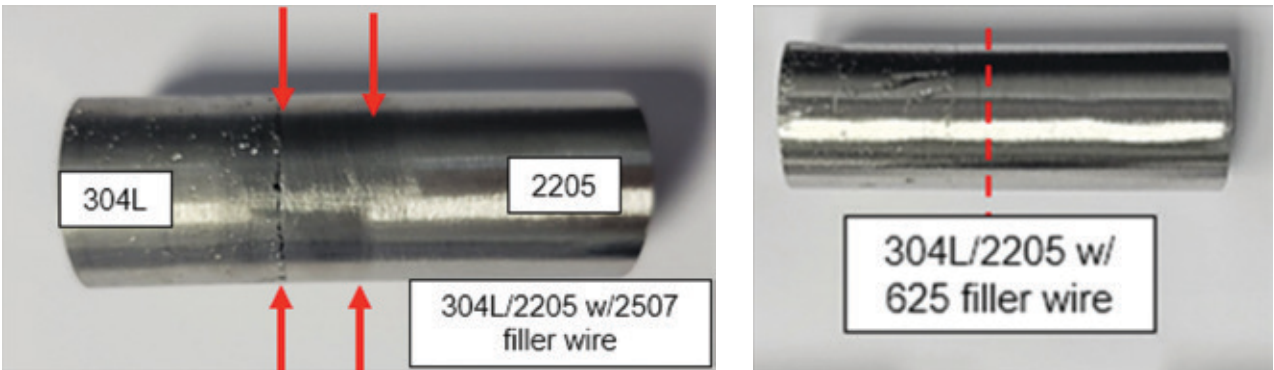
304L - 2205 Weld with 2507 filler wire and 625 filler wire.
